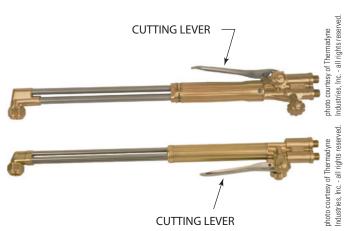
The cutting lever may be located on the front or back of the torch body.
